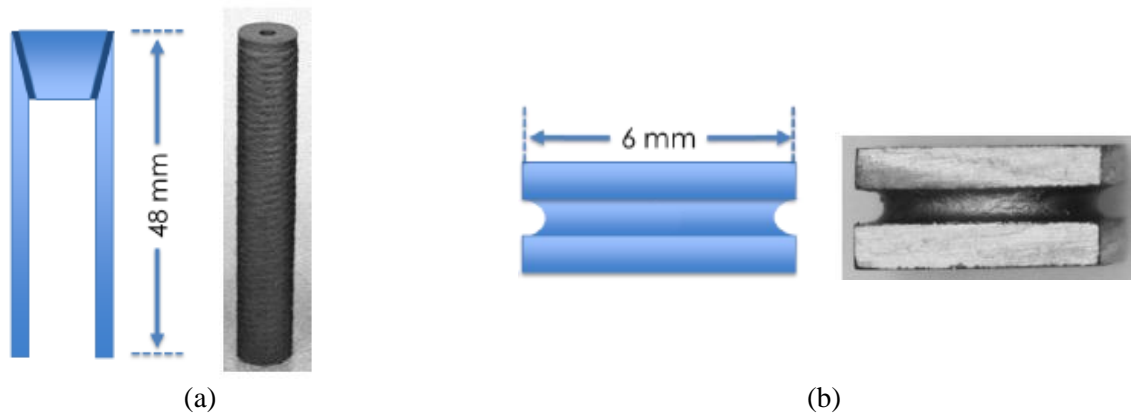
Specimen schematic and picture for (a) the joint end plug specimen, and (b) the square torsion specimen
